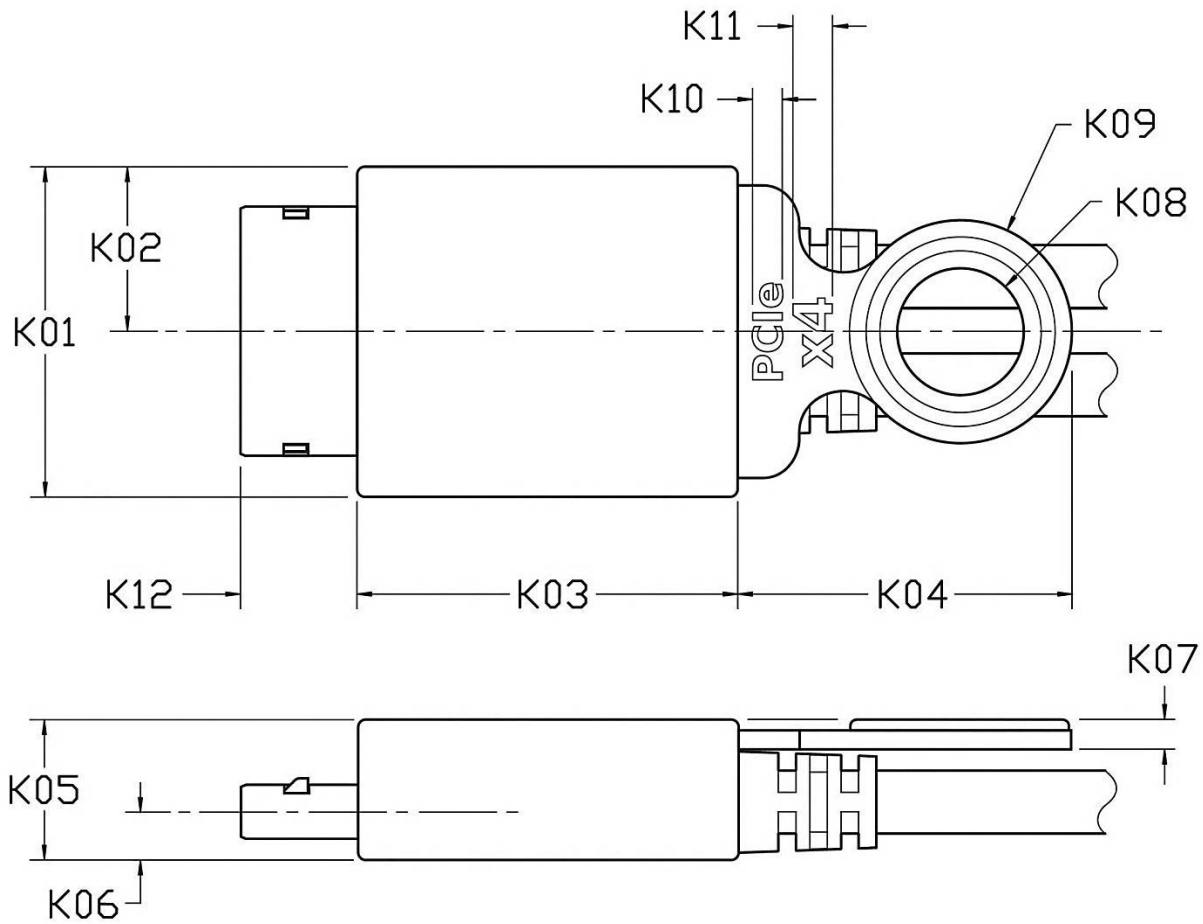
x4 Free External Passive Latch Cable Assembly Form Factor Dimensions
